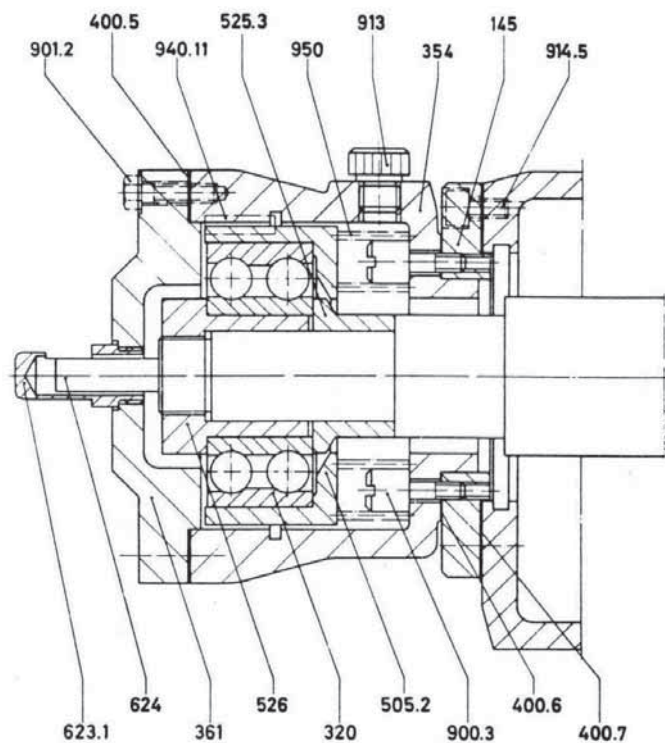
Lift-off device with roller bearings for pumps with plain bearings for sizes 125 and 150
